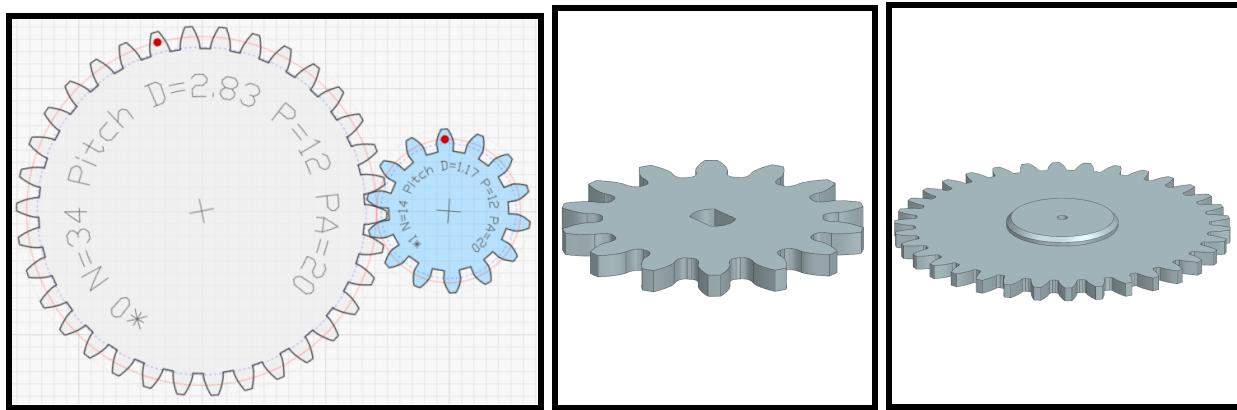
, 6.2.9, and 6.2.10: Gear Generator Render of the Gears Meshing, and Final Gear CAD Models
